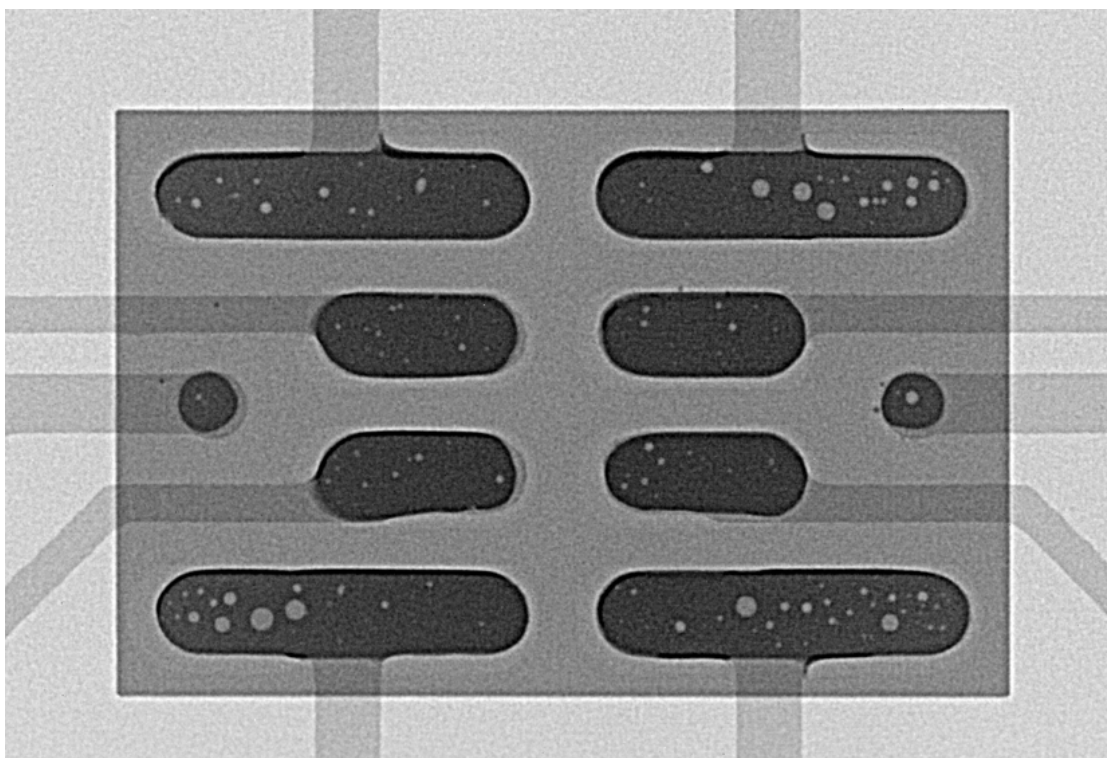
AOS X-ray Checking for Solder Cover on the Sample Parts on the Coupon PCB Board
